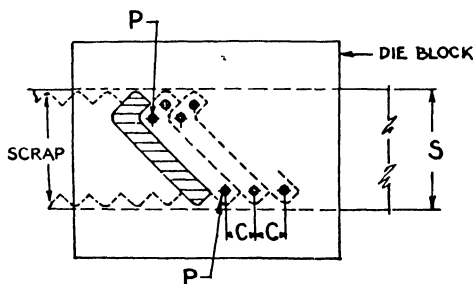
A high-economy scrap-strip layout for cutting L-shaped blanks.
